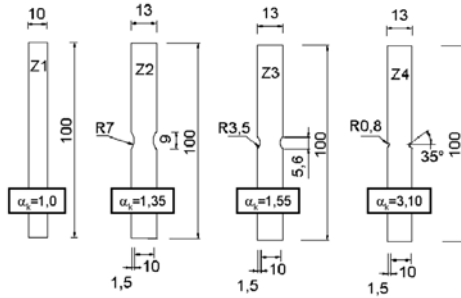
Dimensions of the tensile specimens for the tensile tests
